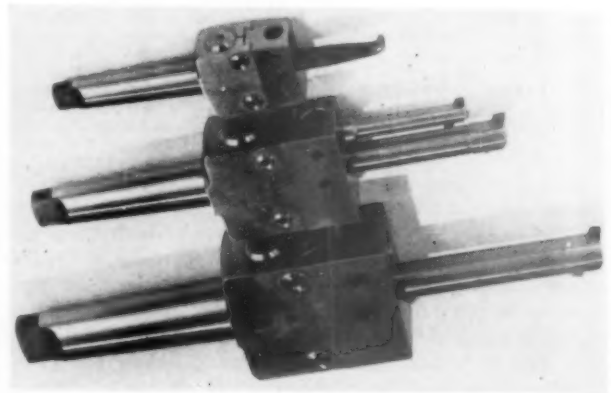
Precision boring tool holders or boring heads with micrometer adjustment. The dial gives readings in thousandths, with vernier readings in 0.0002 in. While shown with square tool bits, the bars can be provided for round bits or for round-shank diamond tools such as shown in Fig. 25. The holders shown, which provide a range up to 15 in. in diameter, are Mastur precision boring heads manufactured by the Maxwell Company, Bedford, Ohio.
